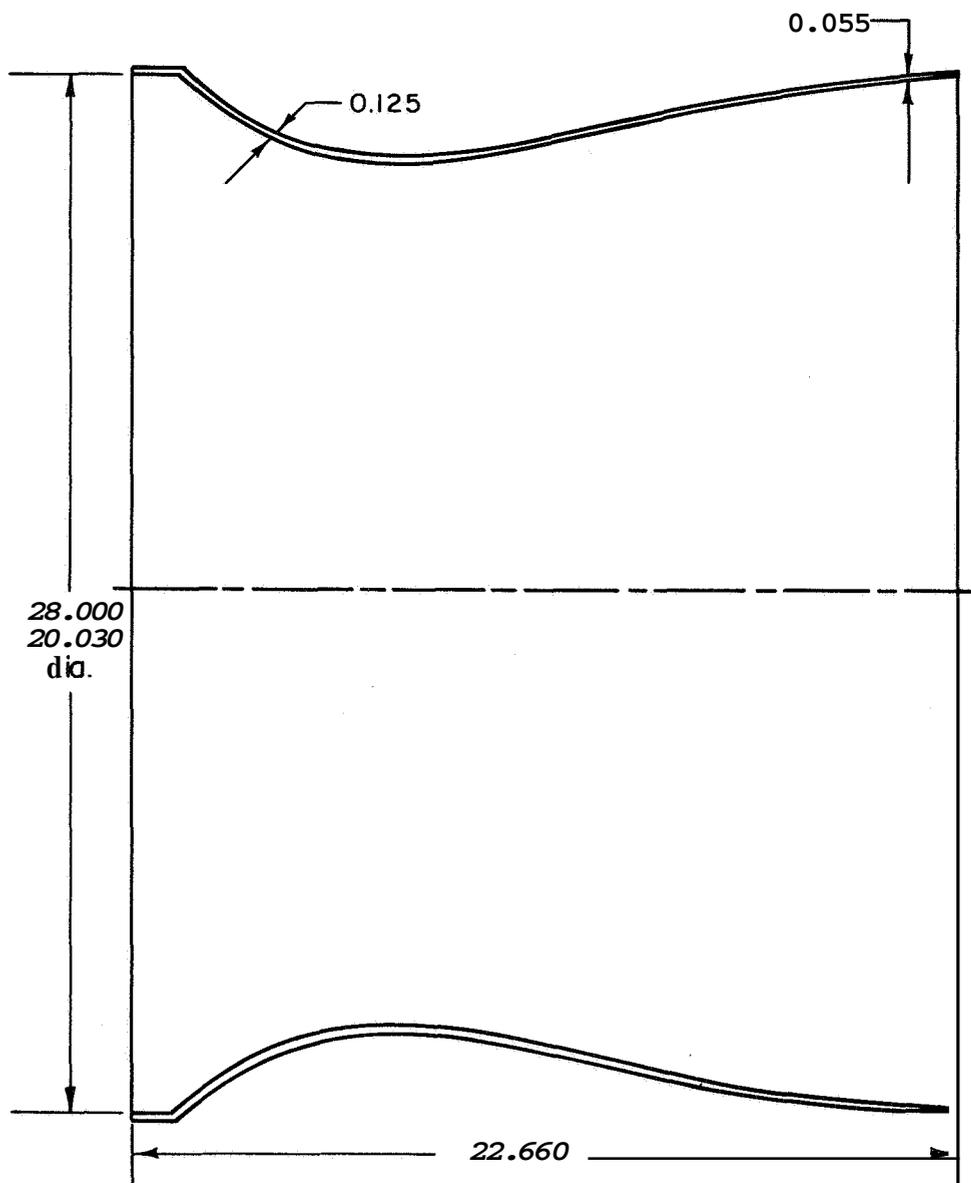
FINISHED 321 STAINLESS STEEL PART DIMENSIONS TO WHICH THE COMBUSTION CHAMBER EXIT NOZZLE IS SHEAR FORMED (Ref. 93)
